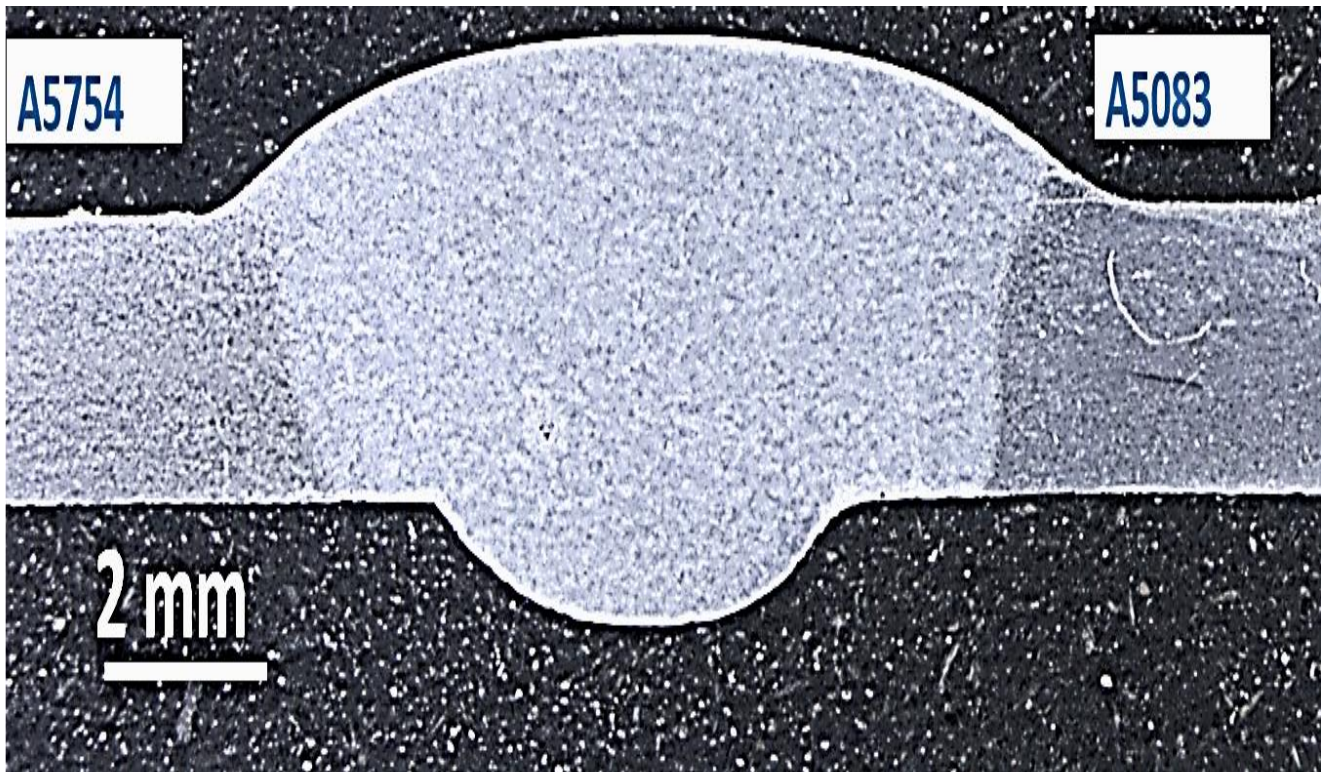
Macrostructure of transverse section of the TIG welded A5754-H111 and A5083-H111 joint using ER4043
